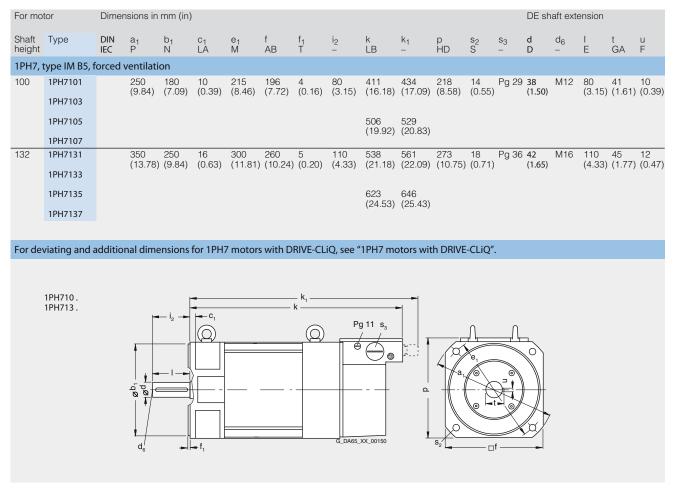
1PH7, type of construction IM B5, forced ventilation
